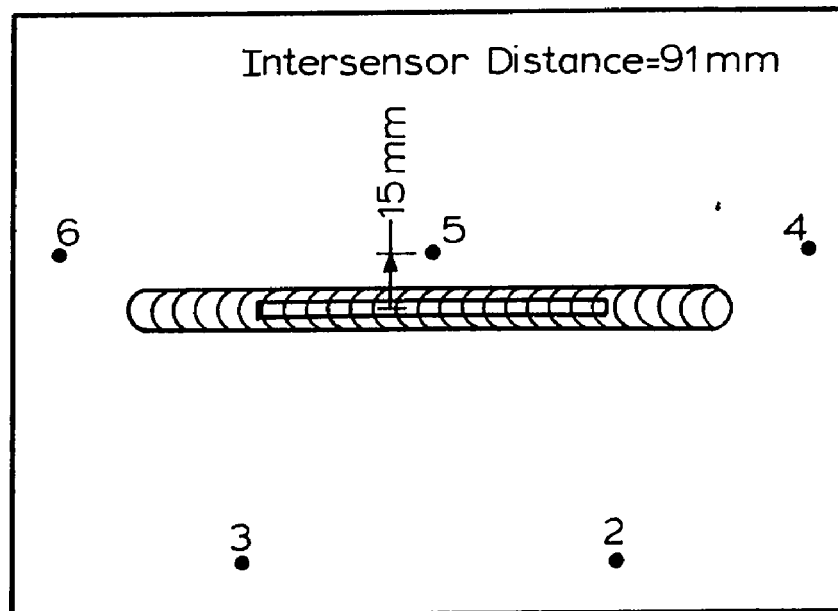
AE Sensor Positions on Slot Weld Test Specimen.
